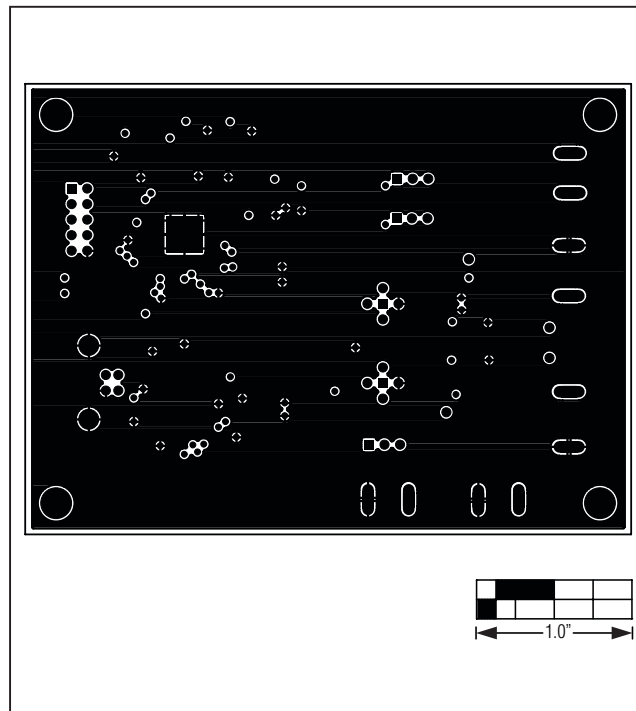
MAX9611 EV Kit PCB Layout—Inner Layer 2
